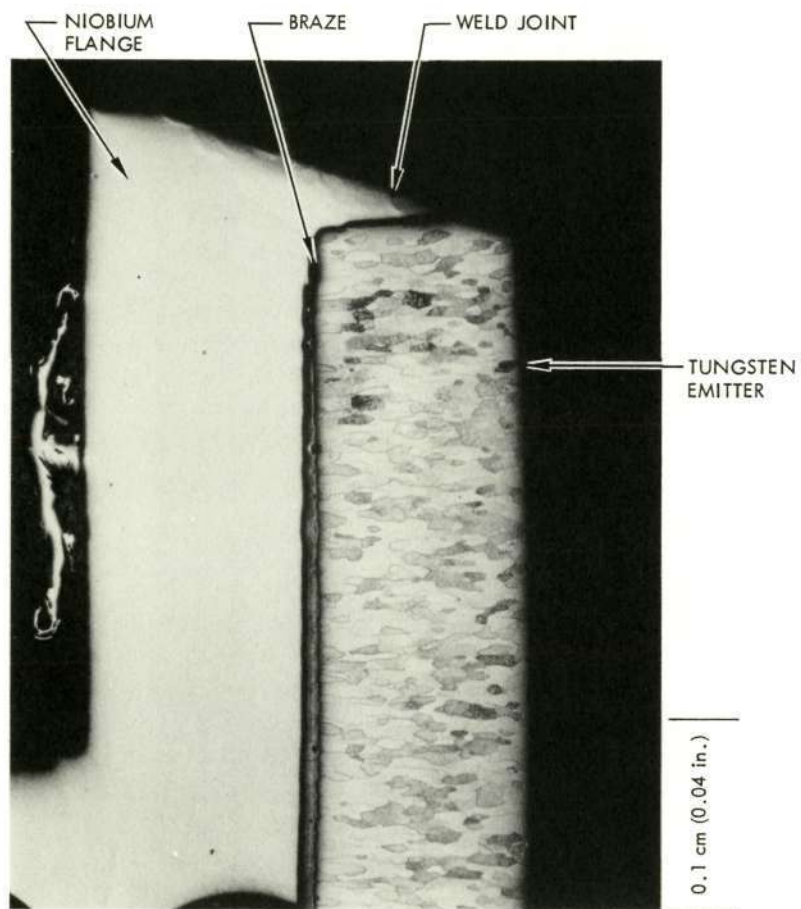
Tungsten emitter to niobium emitter flange weld joint back-brazed with vanadium
